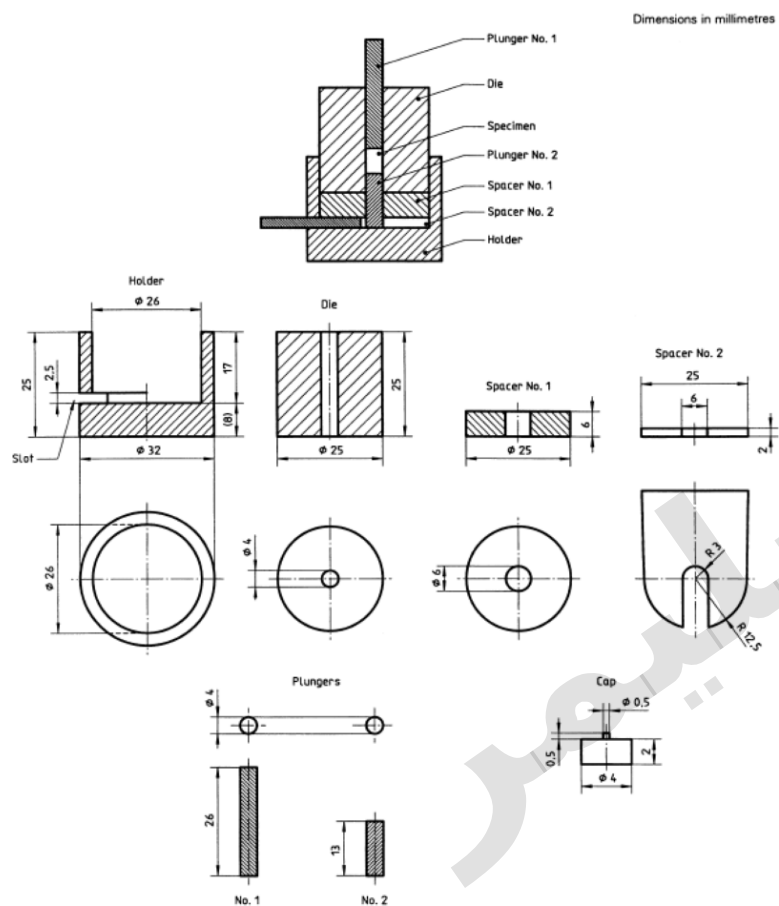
Apparatus for making amalgam test specimens, showing assembled apparatus and dimensions of each component
